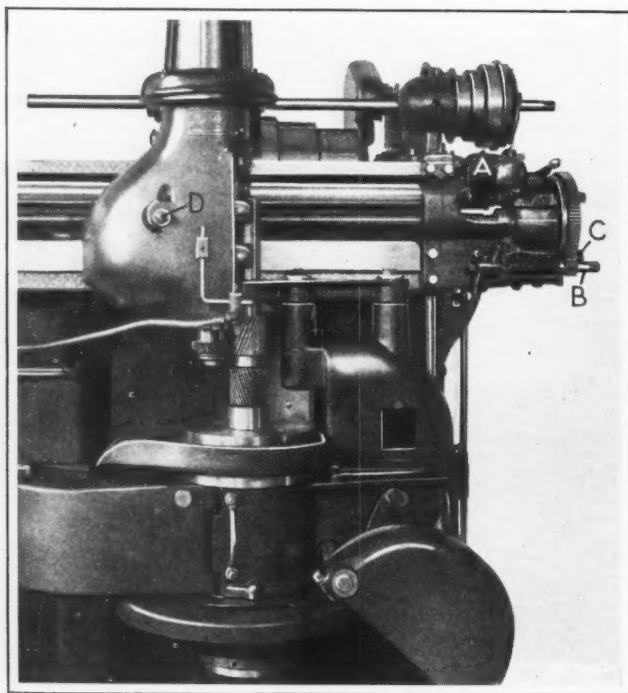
Cutting a Herringbone Pinion on a Gear Shaper
